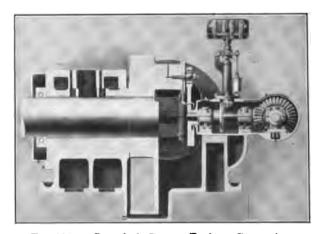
Cam-shaft Gears. Buckeye Gas-engine.
